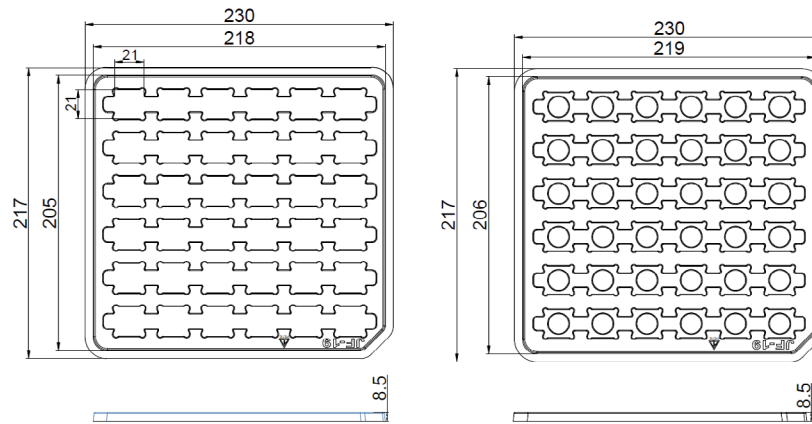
Tray dimensions for L2C6-xxxxxL08x1500.
